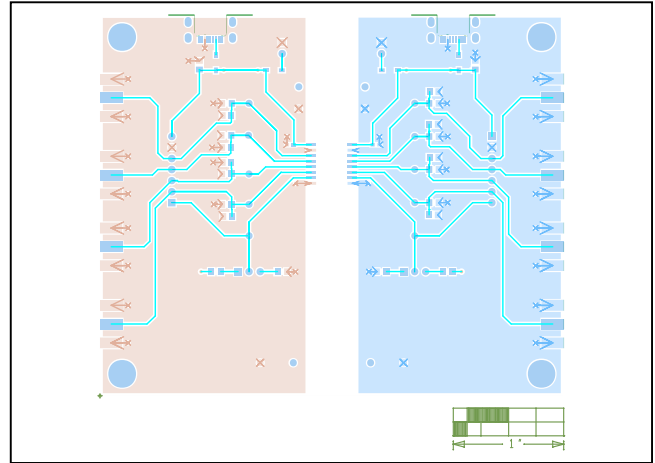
MAX1493X EV Kit PCB Layout (Top Layer)
